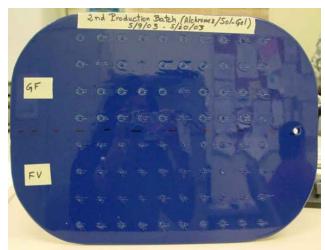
Window cutout panel showing test rivets from the second production batch of sol-gel coated rivets.
